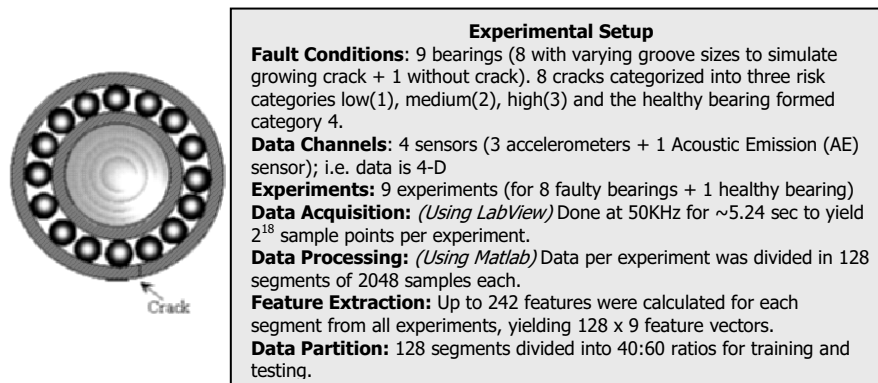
(a) Outer race roller bearing defect. (b) Experimental Setup
